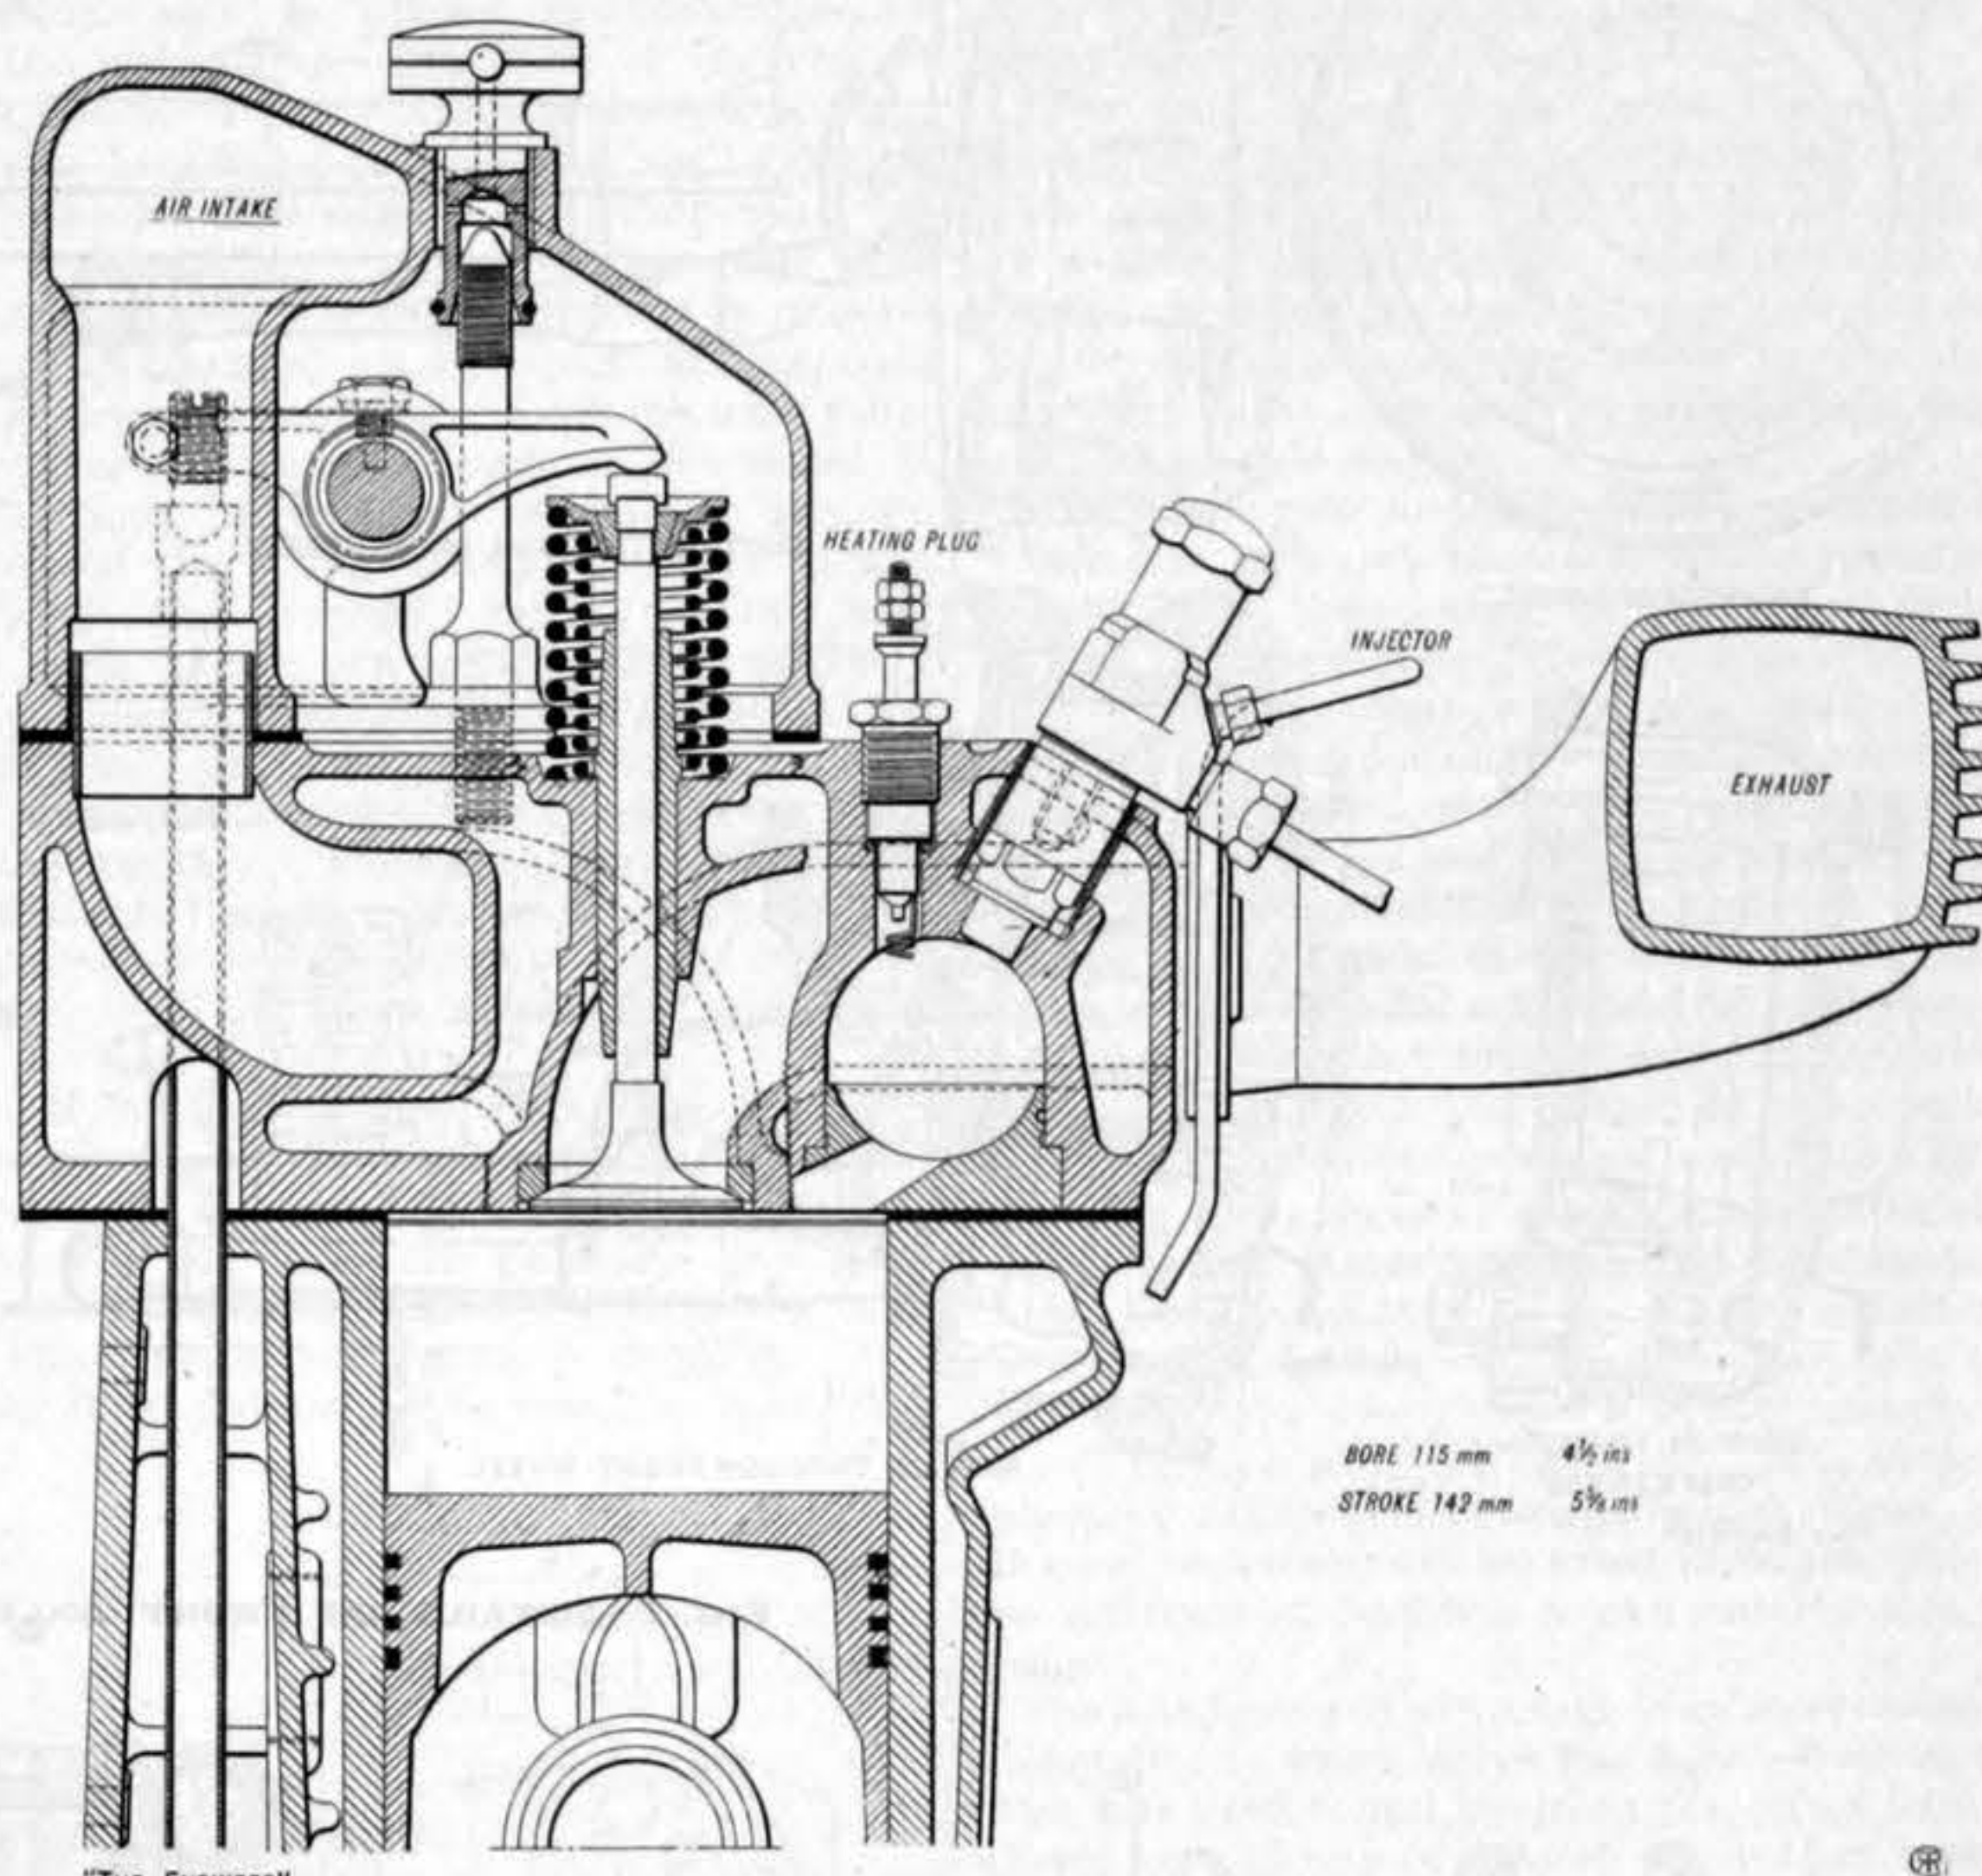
HEAD OF HIGH-SPEED HEAVY-OIL ENGINE-A.E.C.-RICARDO
